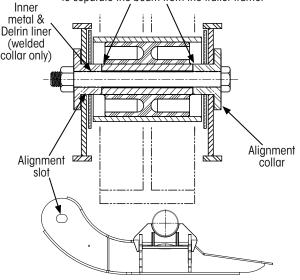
Y-beam Welded alignment collar pivot connection
